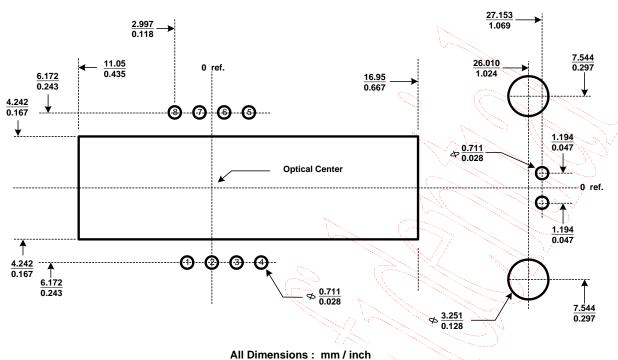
Recommended PCB Mechanical Cutouts and Spacing
